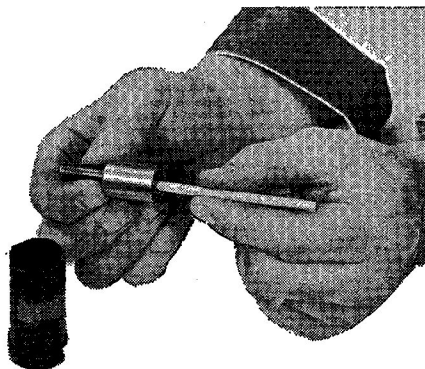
Nozzle seat can be polished by using a small amount of tallow on a polishing stick and rotating nozzle as shown.
